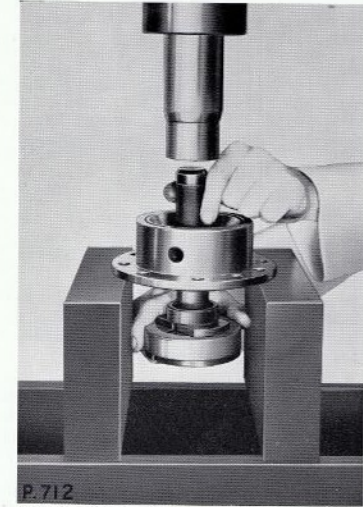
Pressing out the bevel pinion outer bearing cup from the bearing sleeve, using the Churchill Tool R.G.315, in conjunction with the universal handle 550
